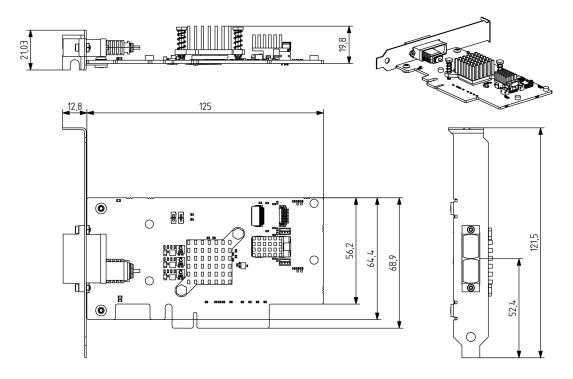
Dimensional drawing of host adapter HA-1P-X4G3-MTP-X8G3
